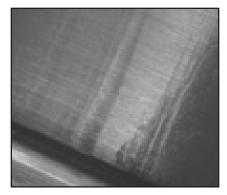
This inner ring of a spherical roller bearing shows roller impact damage from shock loading.
